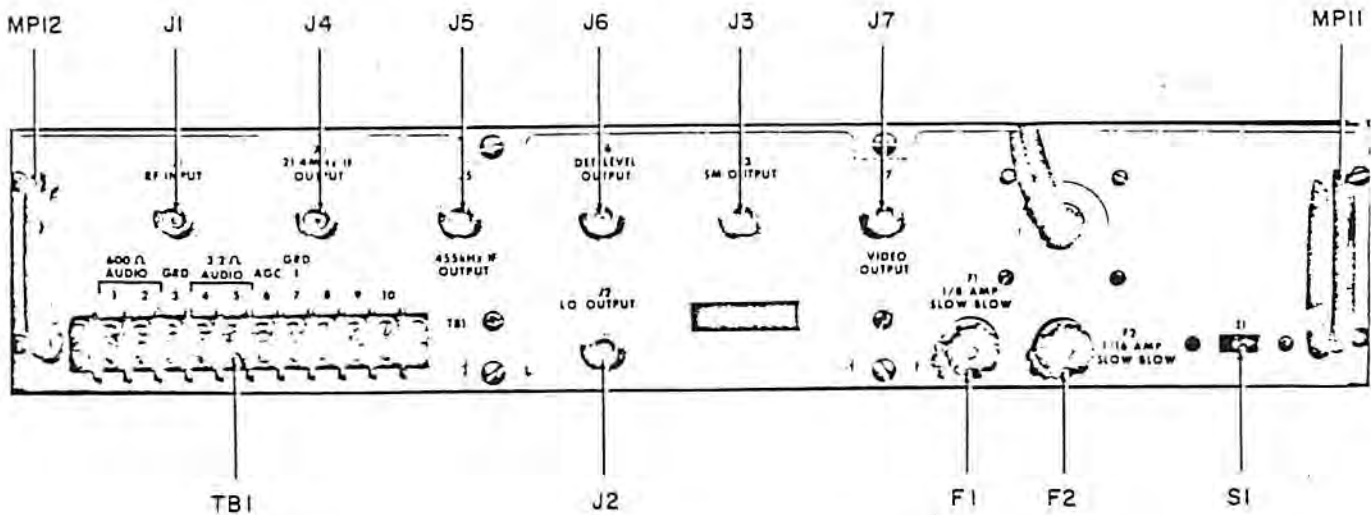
Location of Mechanical Parts, Type 371A Receiver, Rear Apron.
